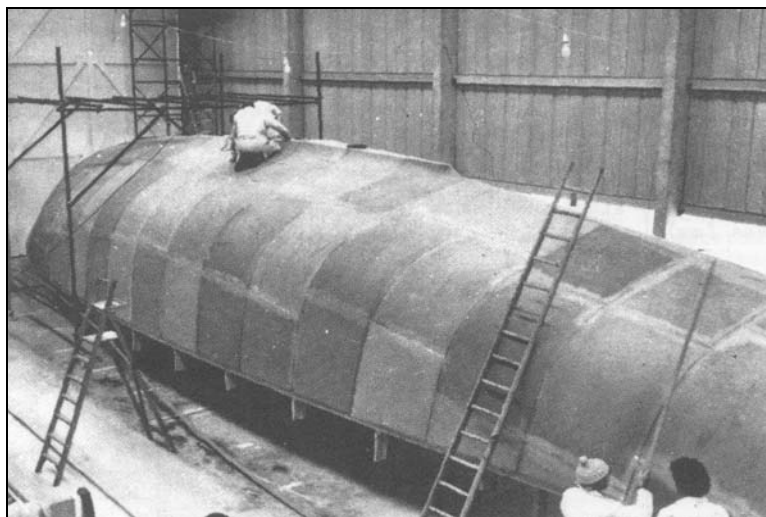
Laying of foam sheets on wooden framework in mouldless technique (Coakley 1991).
